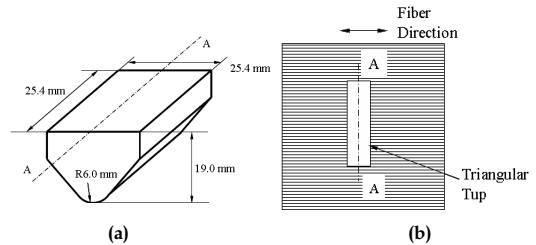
Impactor tup shape and impact loading direction; (a) Tup, (b) Loading direction.
